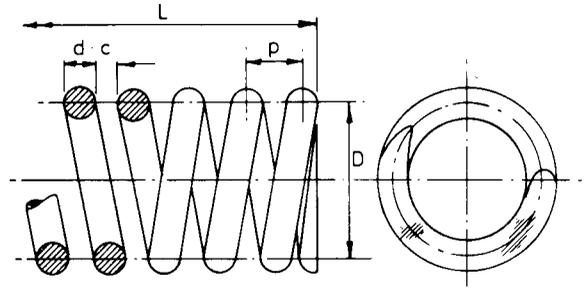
Helical spring dimensions:  $D$  = mean diameter of coils;  $d$  = wire diameter;  $c$  = coil clearance;  $L$  = spring length;  $p$  = pitch
